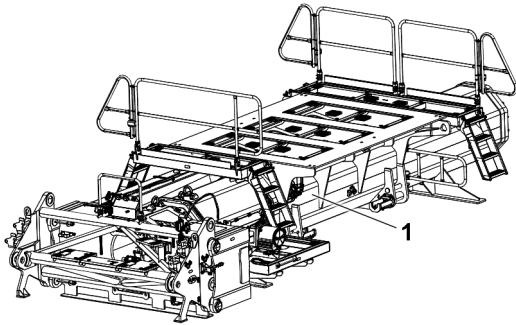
Disassembling the ballast trailer guide – Prerequisites
